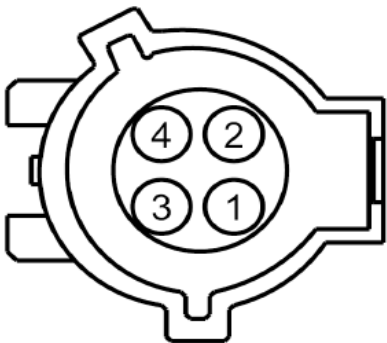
Heated Oxygen Sensor 11 Connector End View (C171)
